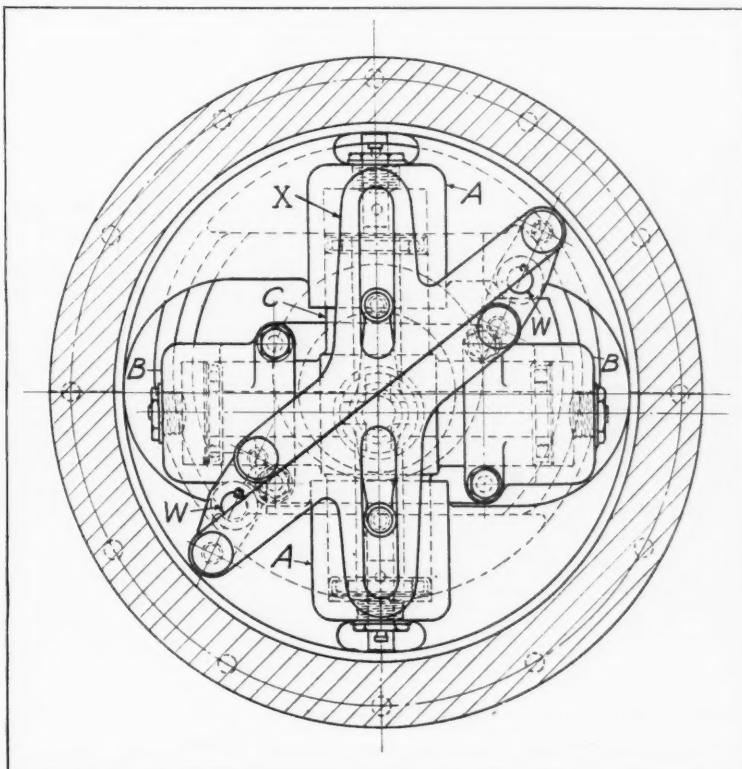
End View, Showing Arrangement of the Cylinders and Pistons of the "Fluid Clutch"
